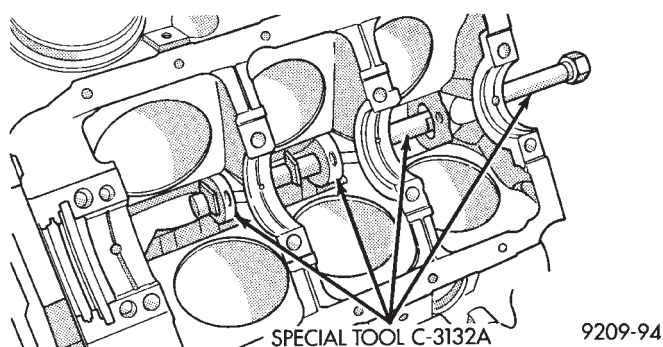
Camshaft Bearings Removal and Installation with Tool C-3132-A
